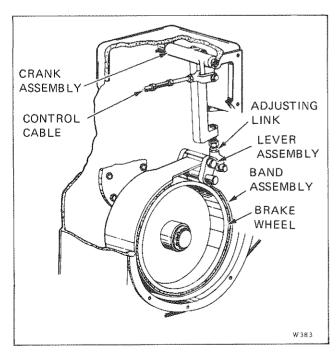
DRY BRAKE ASSEMBLY, DIRECT DRIVE WINCH
